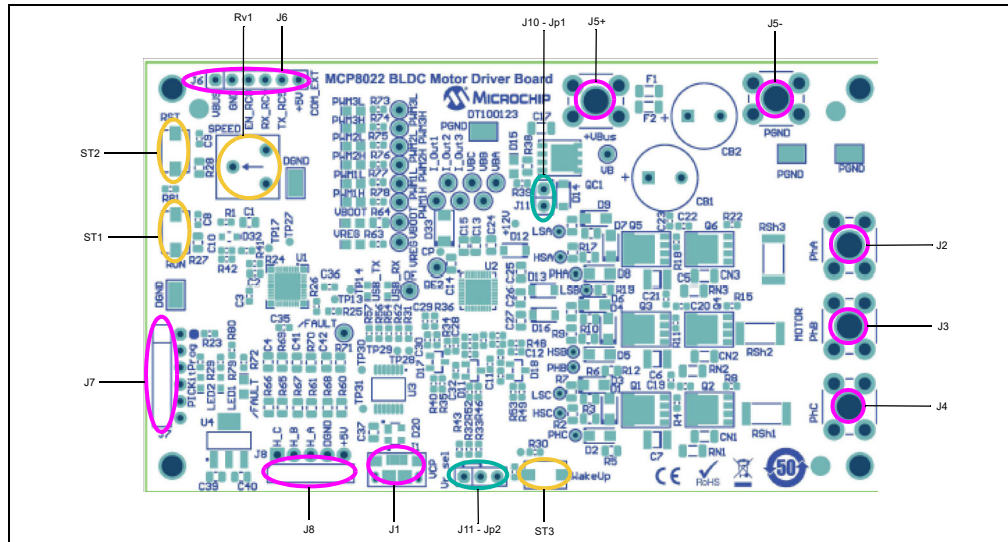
BMCP8022 BLDC Motor Driver Board Jumper/Connector/User Interfaces.
